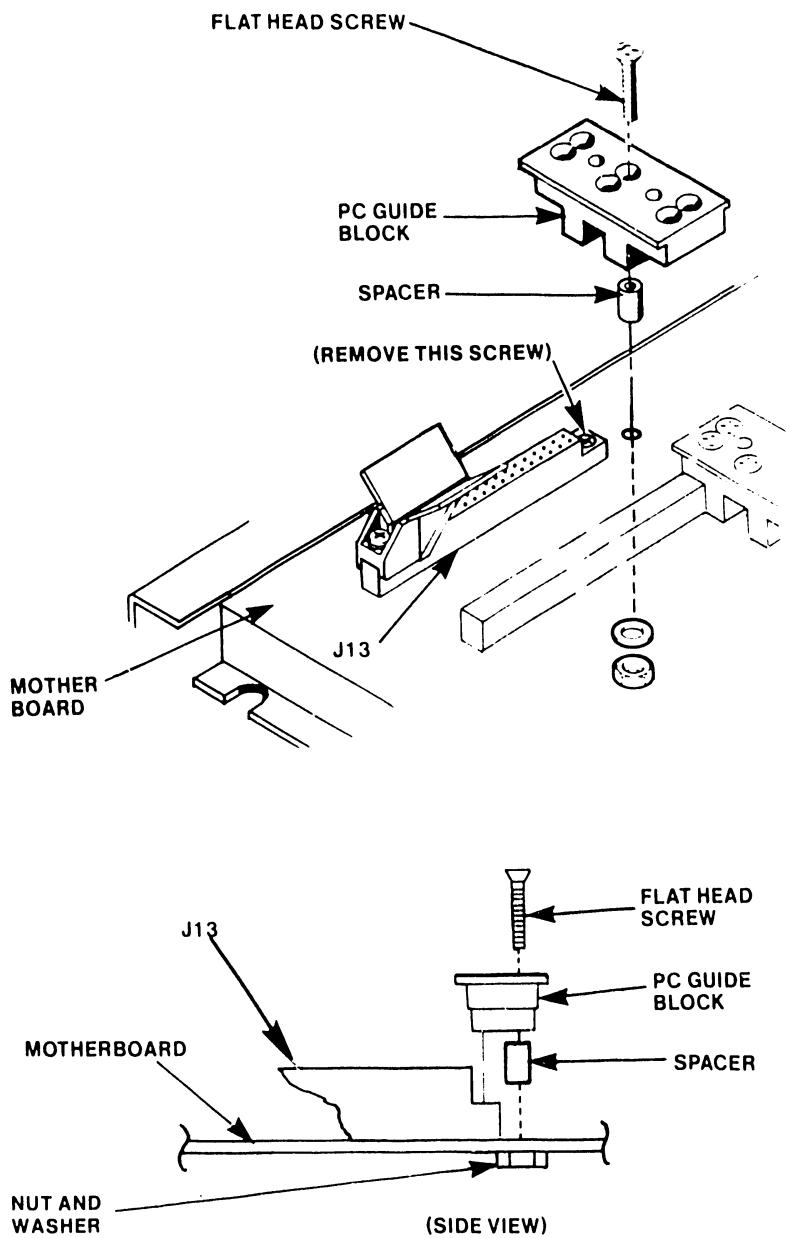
PC Guide Block Installation (140/145 Masters)
